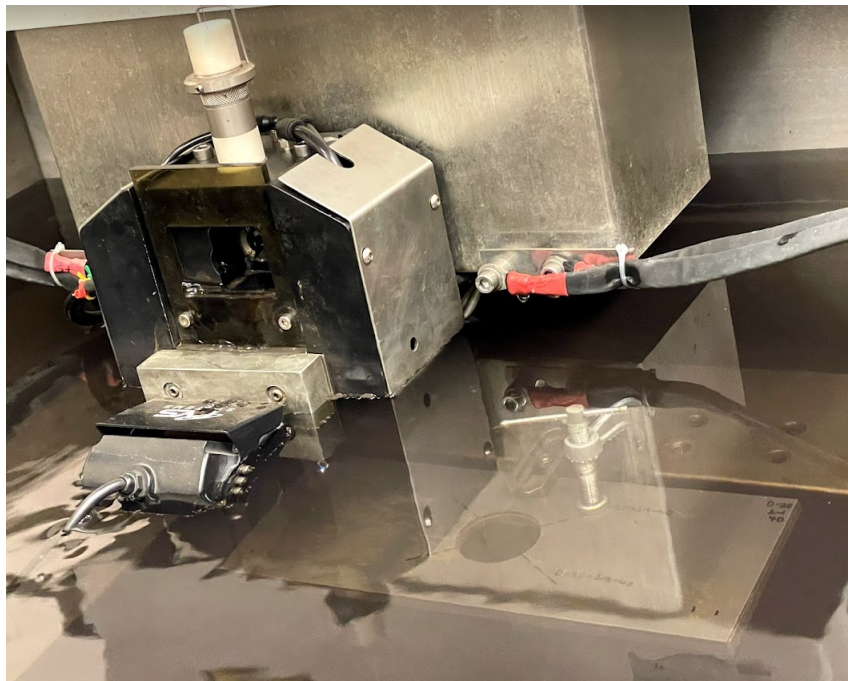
EDM cutting in progress for one of the stockpiles of sheared-edge specimens.
